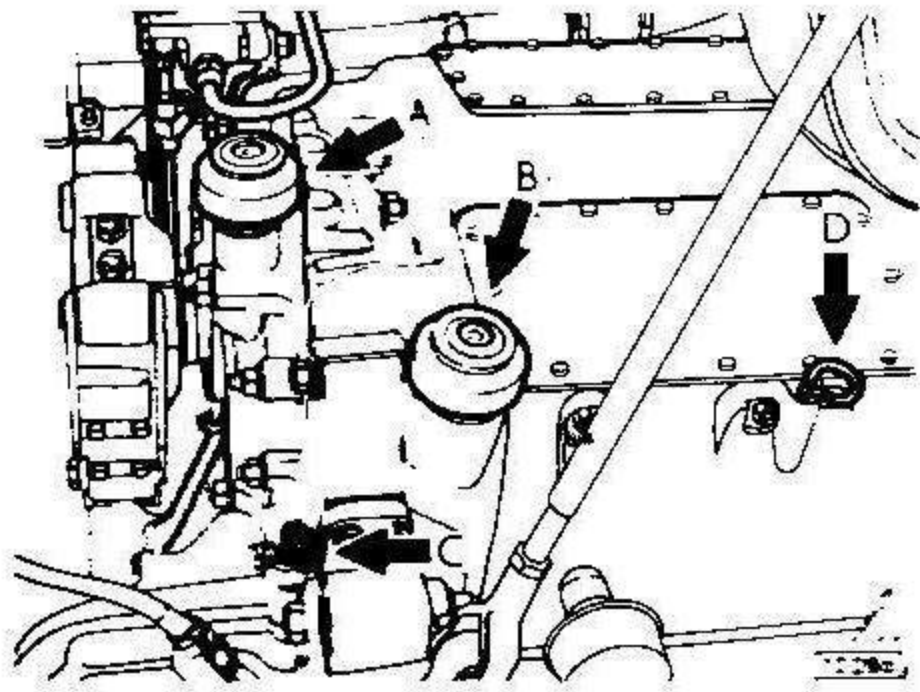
Location of transfer box and gearbox filler plugs and dip sticks.
